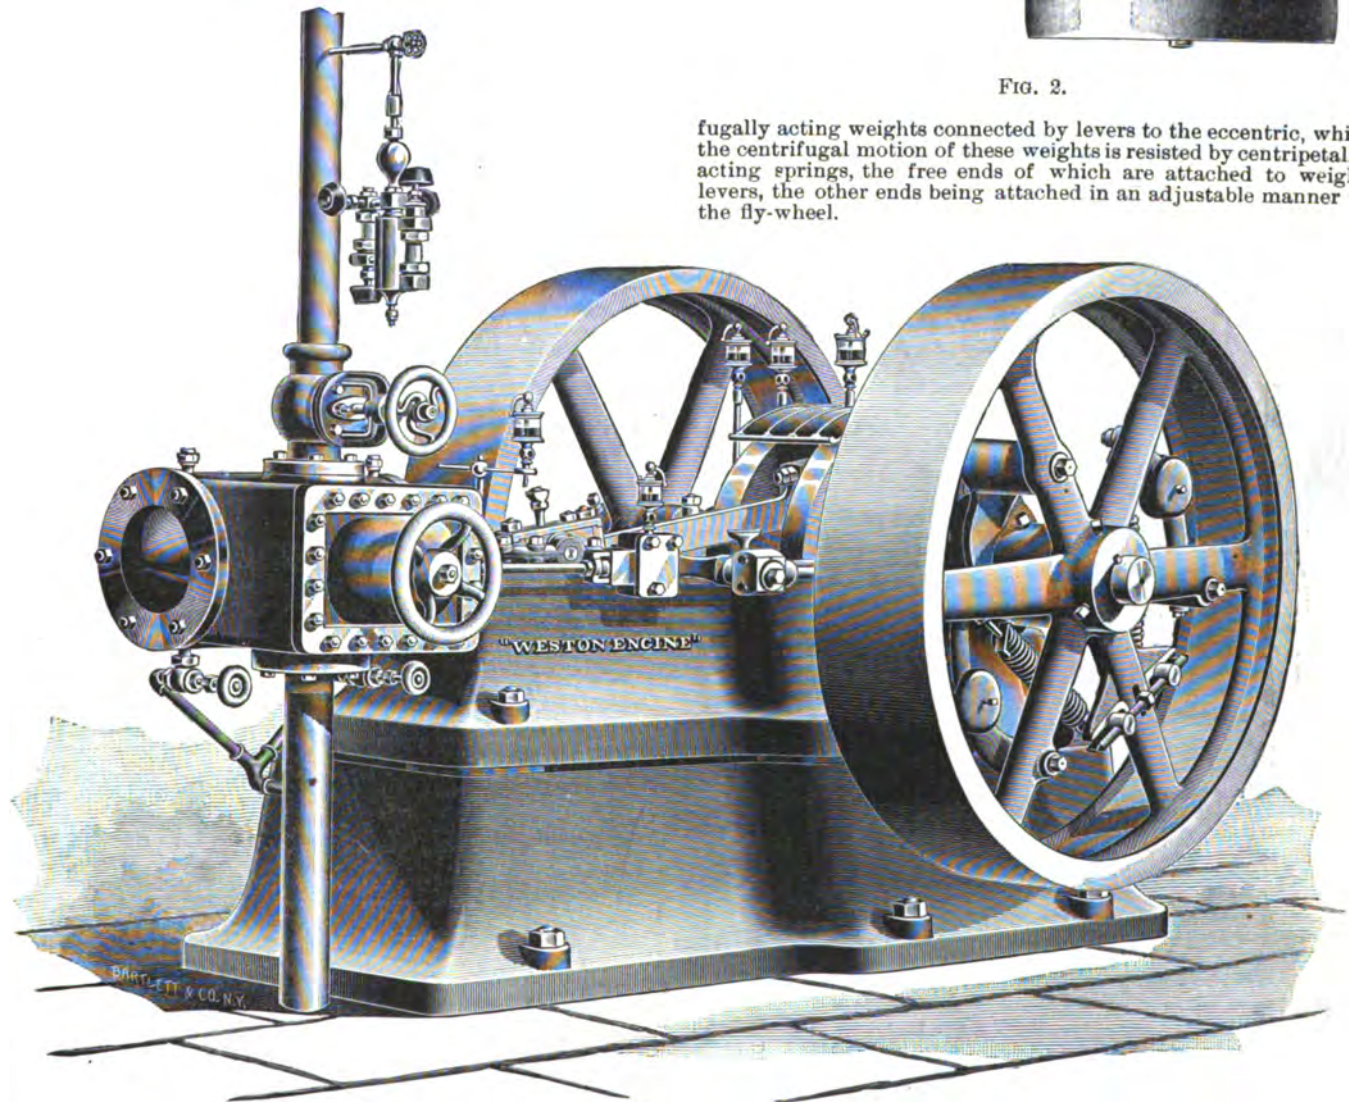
THE WESTON AUTOMATIC ENGINE FOR ELECTRIC LIGHTING.
